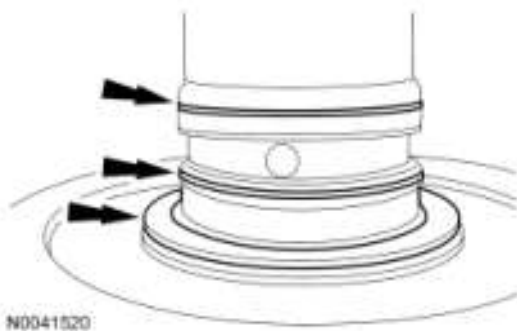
Locating Scarf Cut Seals And Roller Bearing
